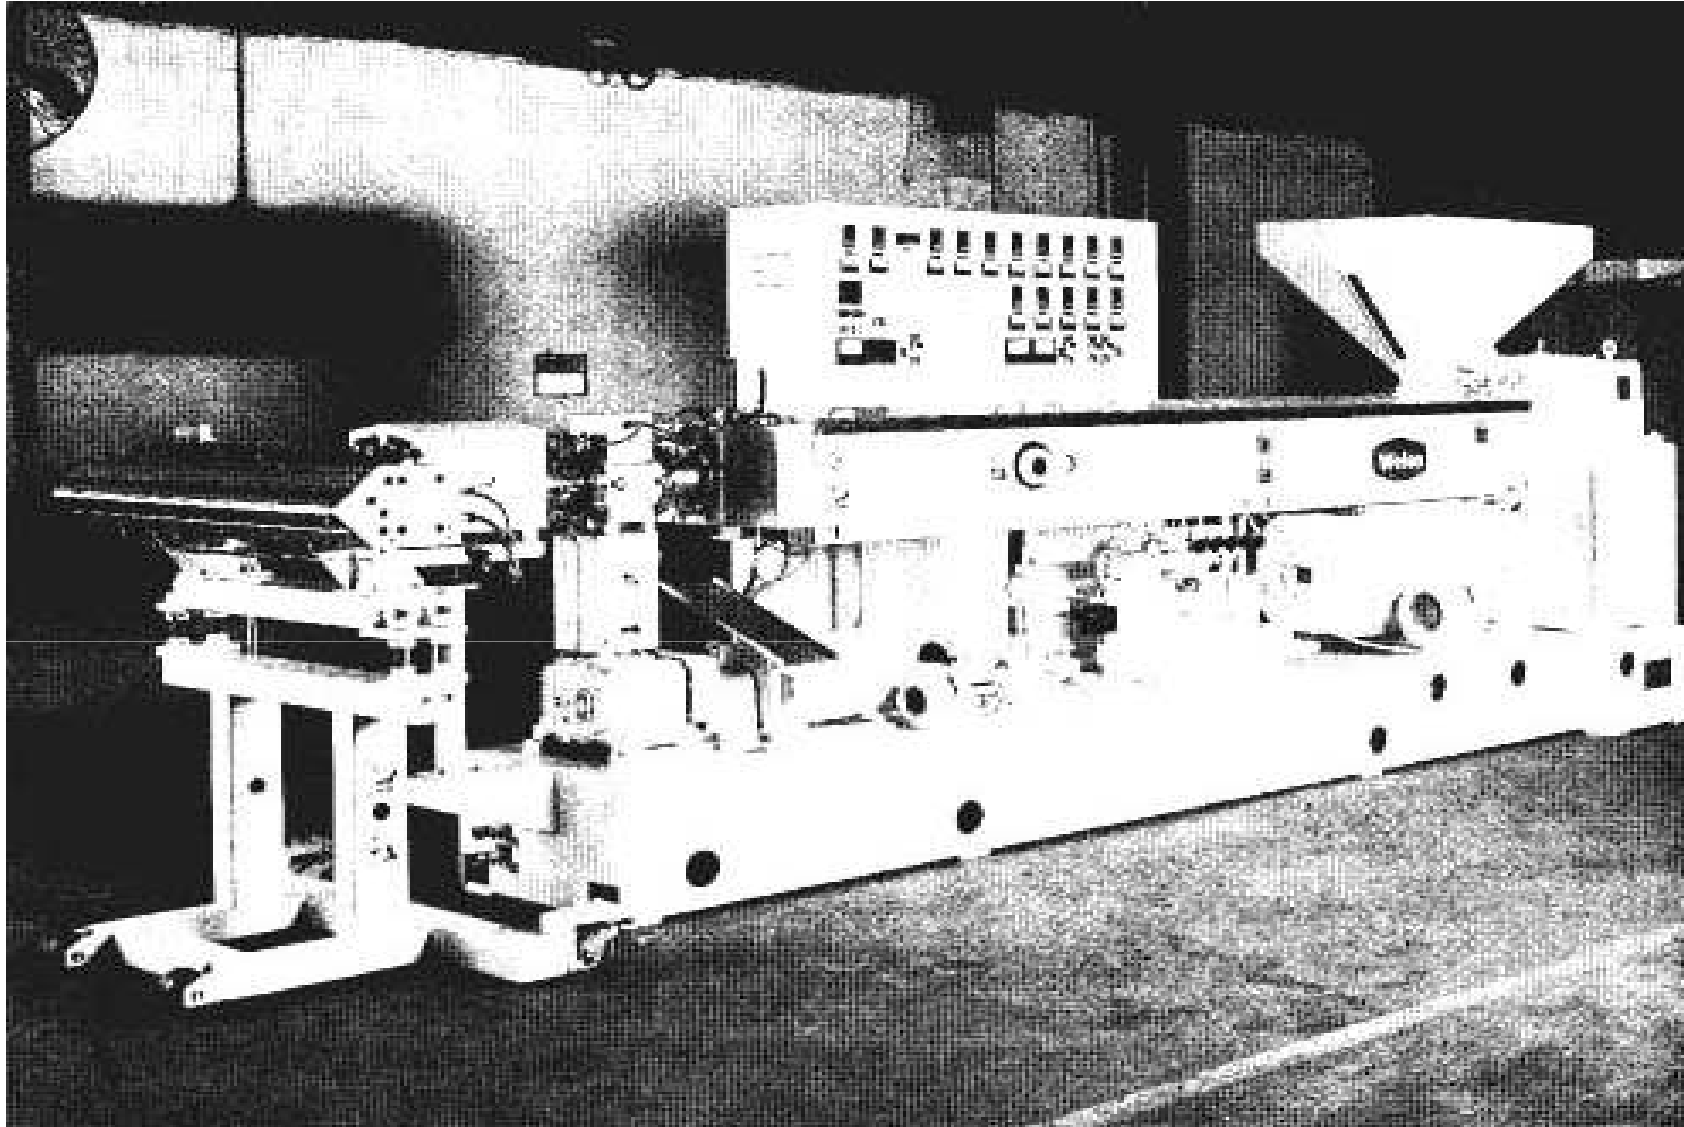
Example of Welex extruder with vent hole, screen changer, gear pump, static mixer, and sheet die.
